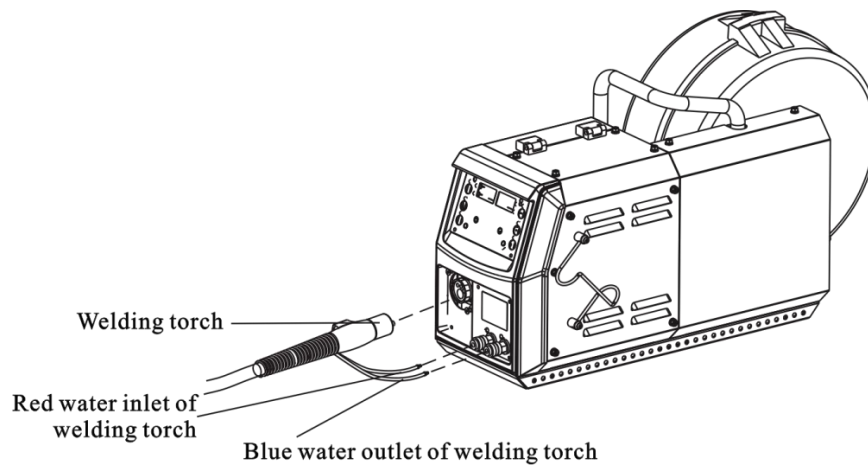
Connection of welding torch of enclosed type manual wire feeder
